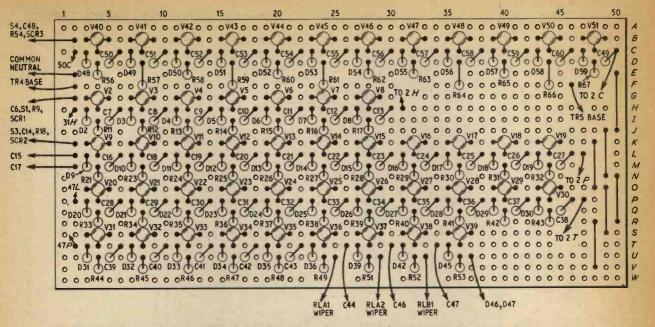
Component layout of Board I. All components are viewed end on. Pins are inserted as in text
